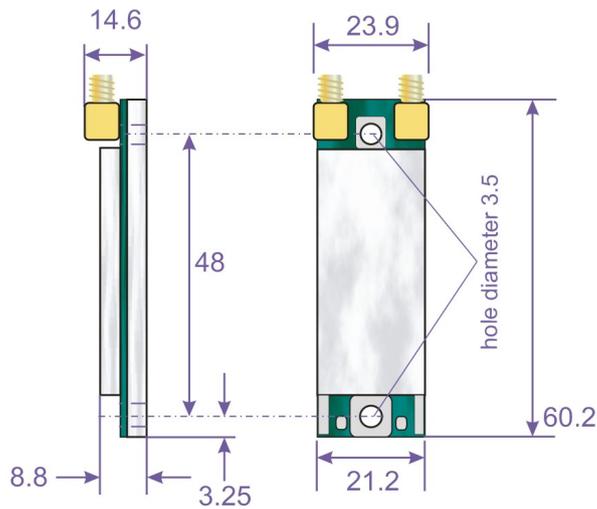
Outline dimensions 2-channel version with SMA output sockets (units: mm)
